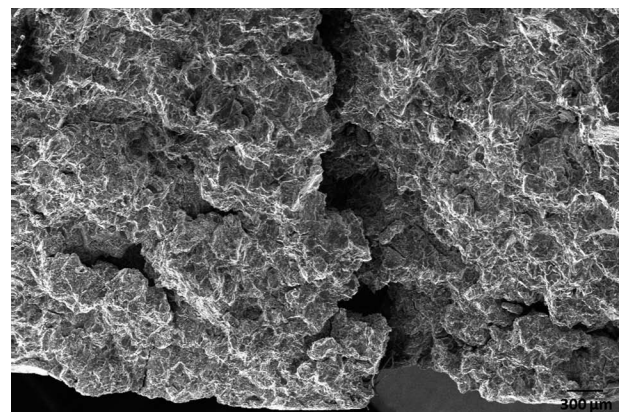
Fracture surface of a very large A 356 casting that was burst tested. The appearance here is typical of cast product
